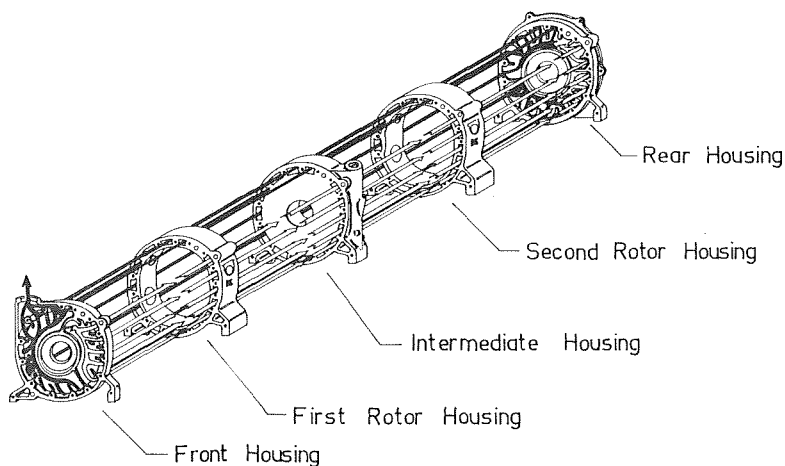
An optimized inlet and outlet passage combination for an axial cooling system of a two-rotor rotary combustion engine
